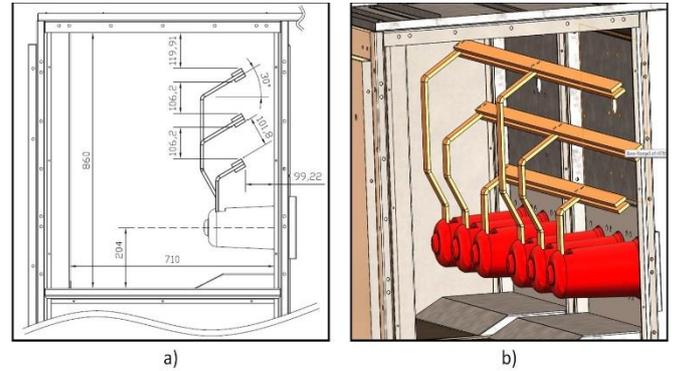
Newly proposed system - busbar system without supporting insulators: a) busbar geometry/dimensions b) 3D model drawn in SolidWorks
